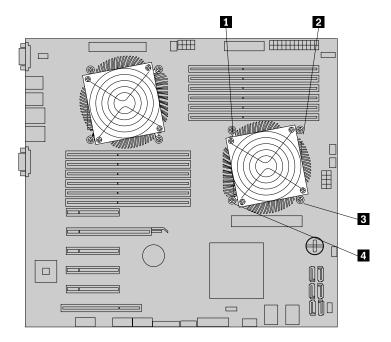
Installing the screws to secure the heat sink and fan assembly 1
